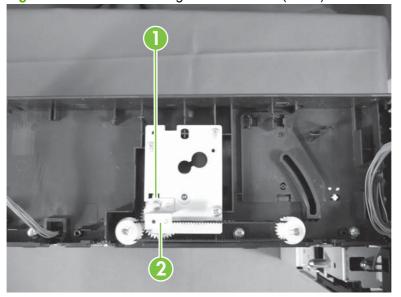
Remove the right belt-drive unit (4 of 6)
